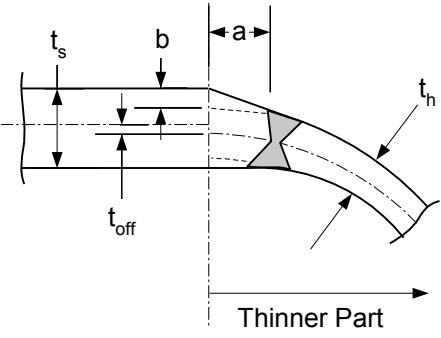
(VIII-2 Table 4.2.2) – Definition Of Weld Joint Types
